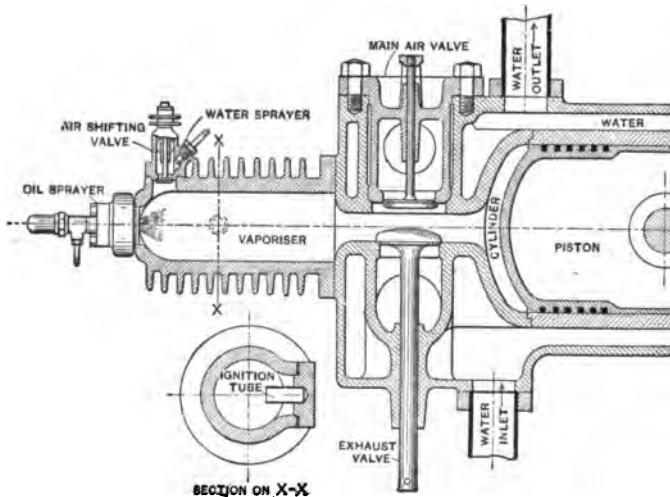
Section of vaporizer and valve chamber. New Crossley.
